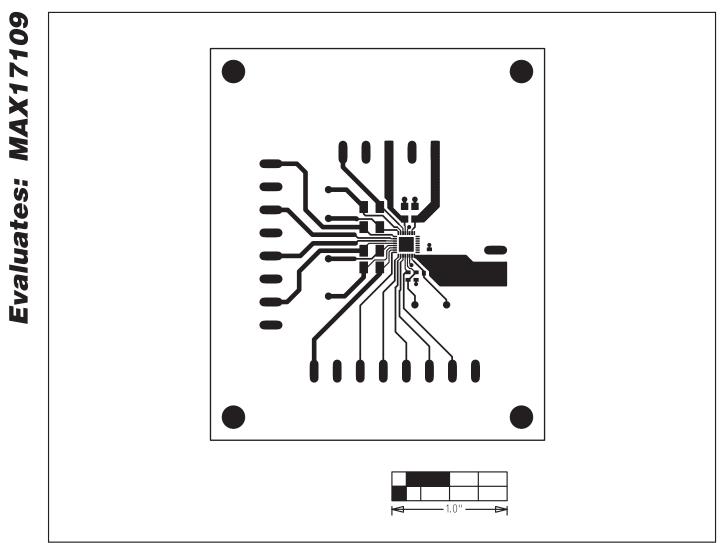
MAX17109 EV Kit PCB Layout—Component Side
